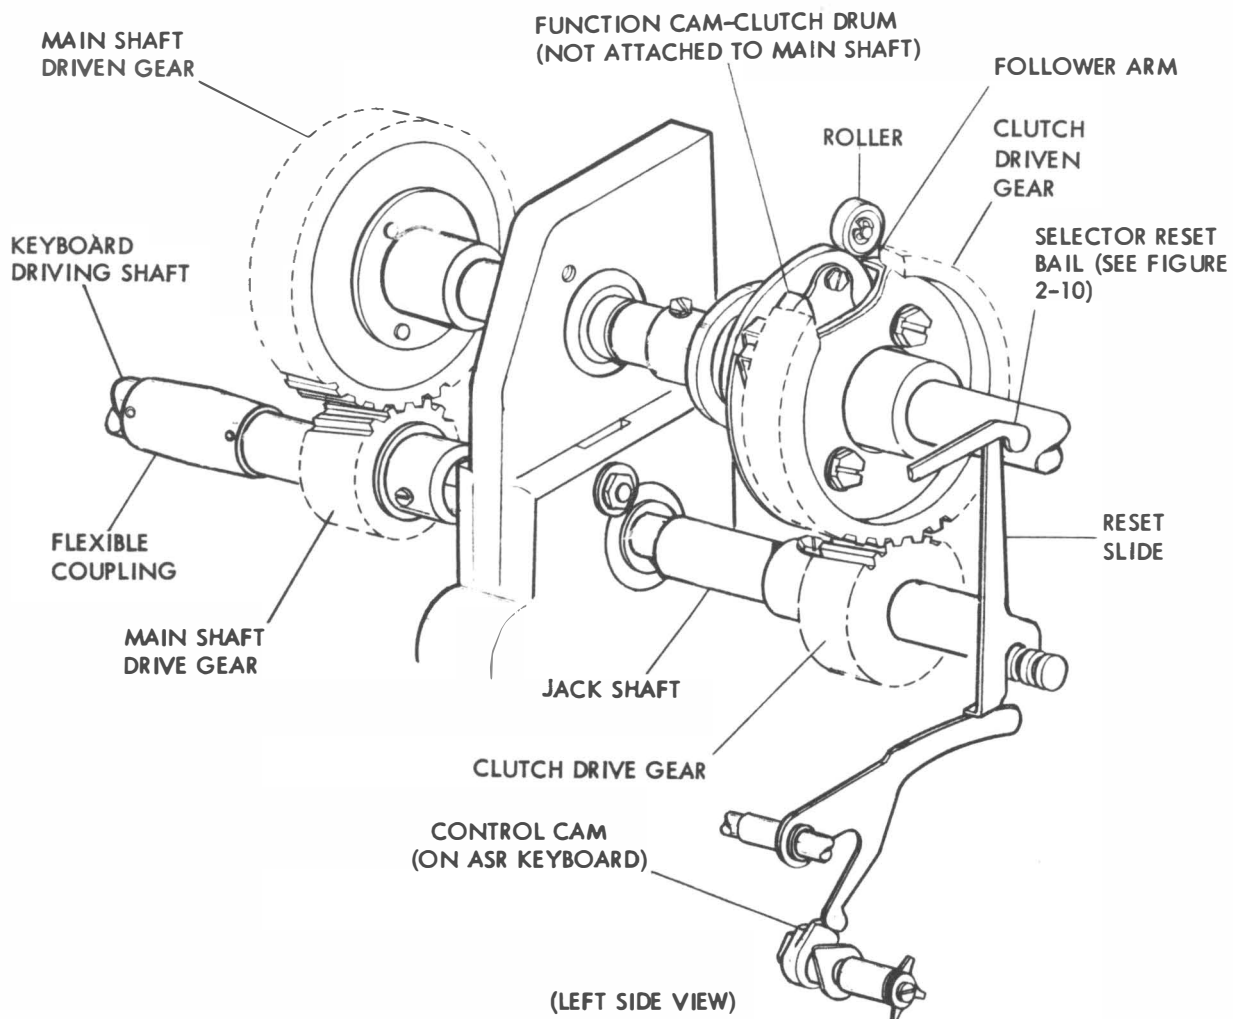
Shafts (Two-Shaft Typing Reperforator Unit)
